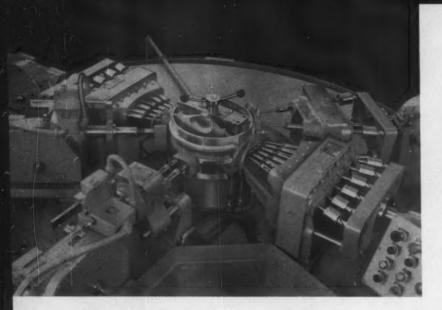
One of three special horizontal machines used for drilling through the wall of the gimbal casting. This machine has five power-heads—electrically driven and camfed—that drive seventeen tools for drilling, countersinking, tapping, spot-facing, and counterboring.
